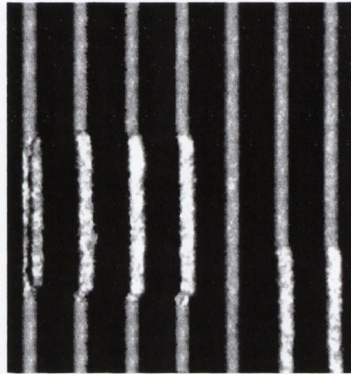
Solder Paste deposit of the Red Channel Image.
